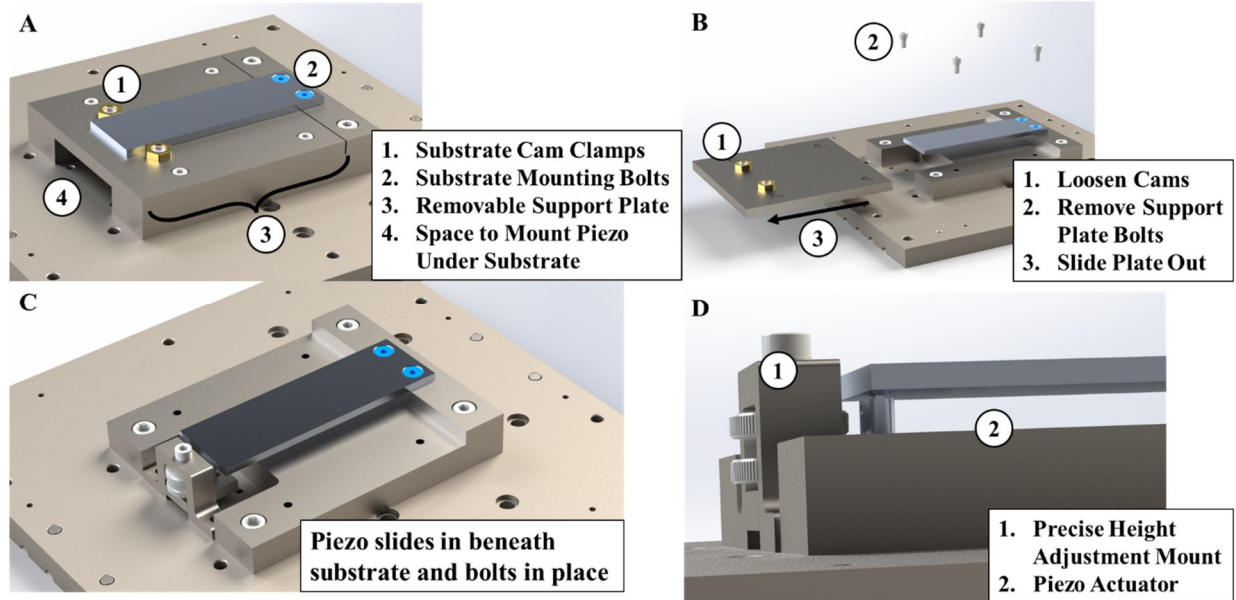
Mid-print analysis, cantilevered experimental setup concept: (A) Print setup overview, (B) Transformation to cantilevered measurement setup, (C) Cantilevered top view, (D) Piezo placement closeup
